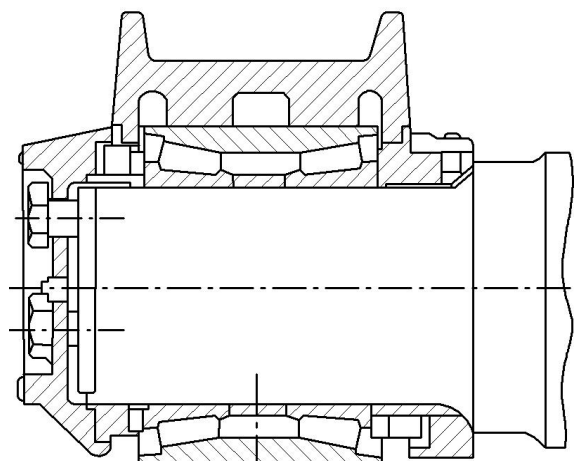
Timken axle box with double row tapered roller bearing.
